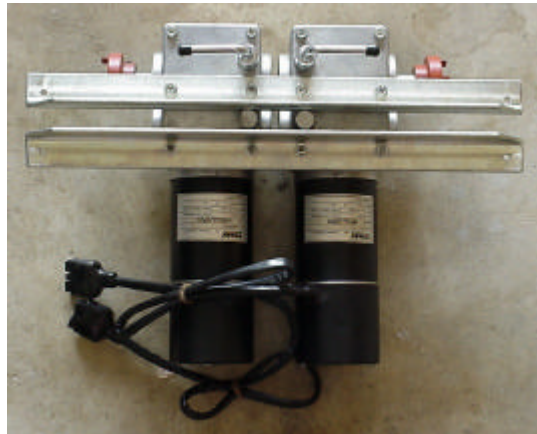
Motor-mounting brackets attached via four of the six gearbox cover plate cap screws
